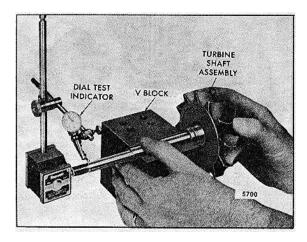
Measuring Concentricity Between Large and Small Turbine Shaft Diameters
